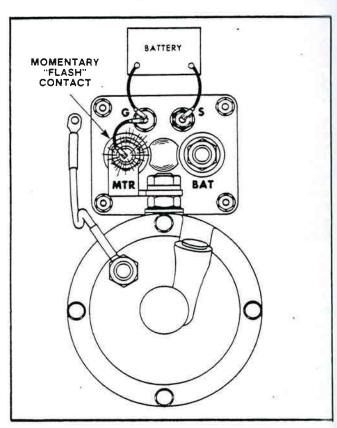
Connections for Checking Pinion Clearance (40MT & 50MT).
